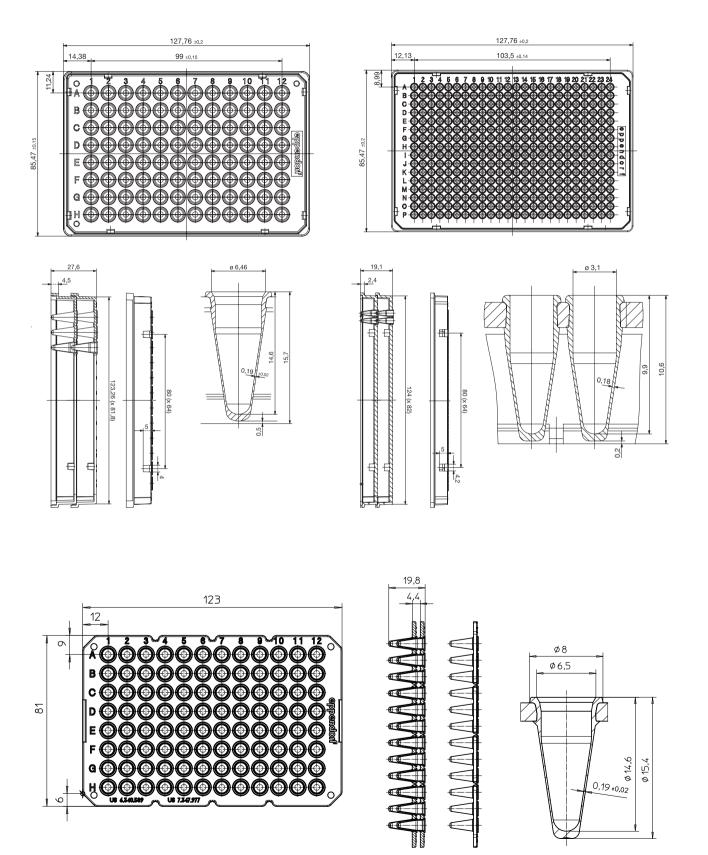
, 2 and 3: Technical specifications. All dimensions in millimeters.
